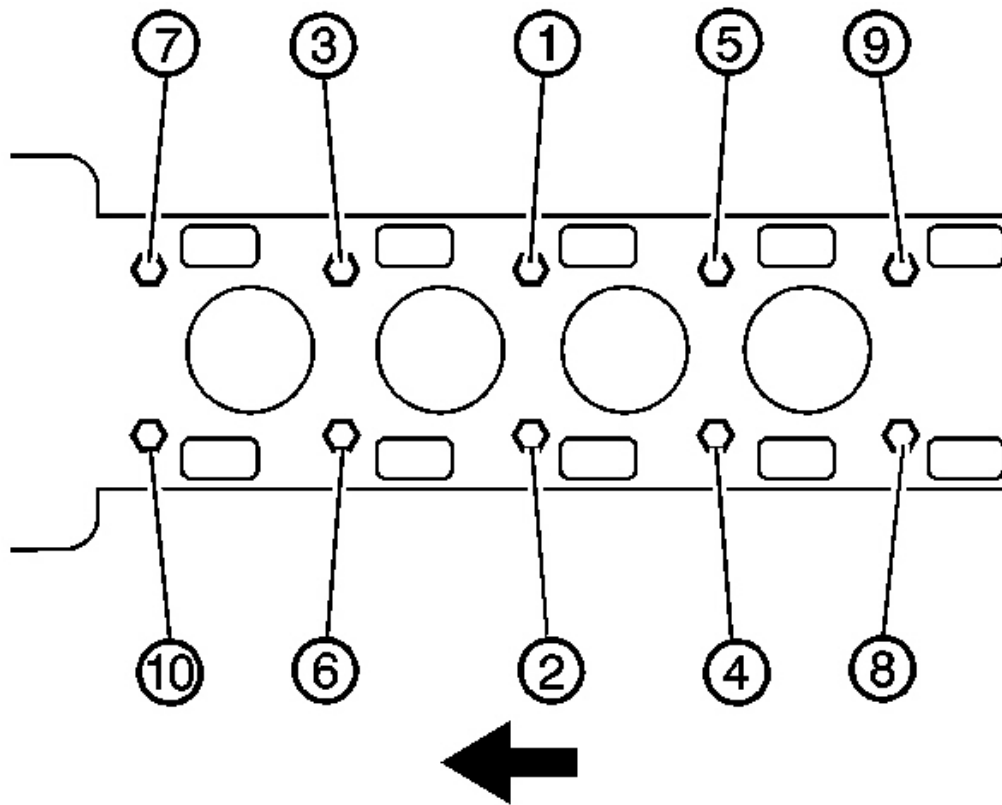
Identifying Cylinder Head Bolt Tightening Sequence
